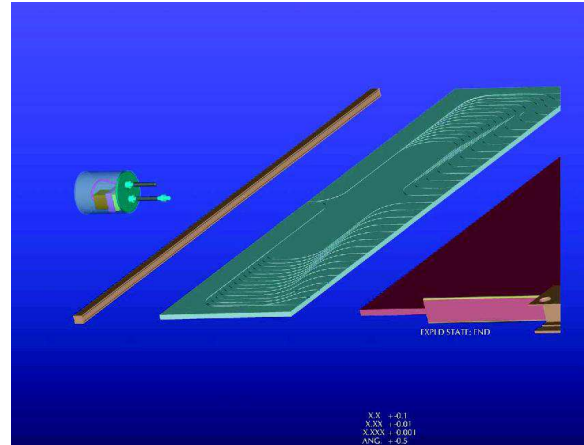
Exploded view of the end of the scintillator housing module showing routing of fibers, PMT containment, and other details.
